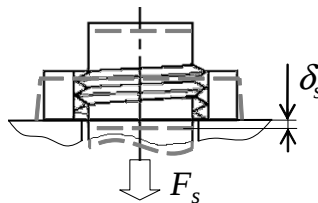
Axial displacement δ_s developed in the engaged thread due to axial load F_s .
